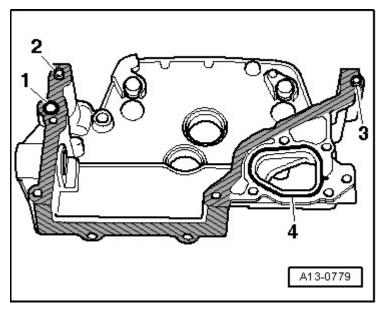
Checking Dowel Sleeves And Are Inserted In Upper Cover For Camshaft Timing Chain Courtesy of AUDI OF AMERICA, LLC
